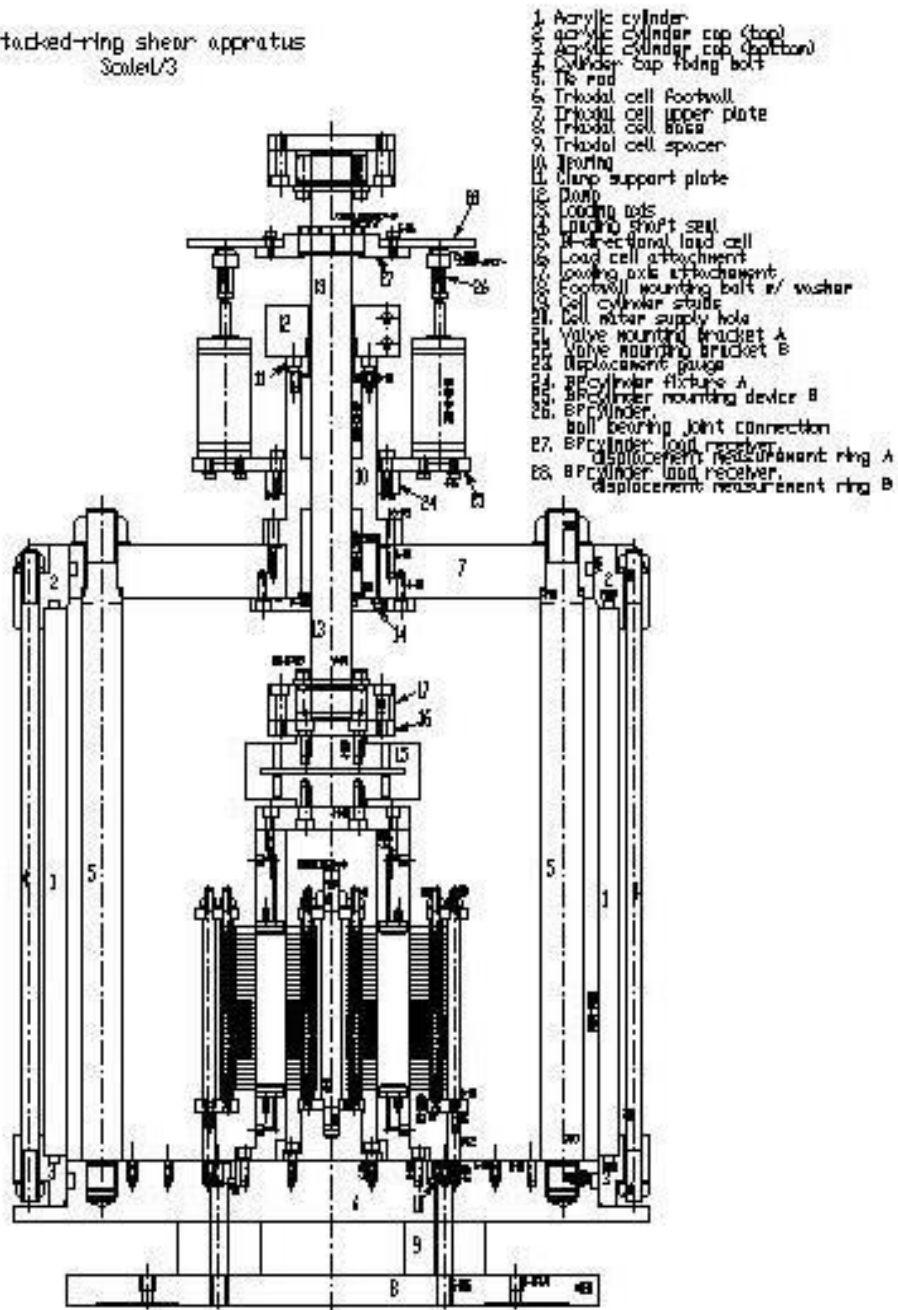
Schematic figure of overall overview stacked-ring shear apparatus
